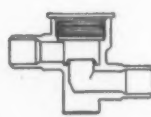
The main body, devoid of all internal parts, is now ready for cleaning and fluxing of the sweat tube connections preparatory to soldering.
